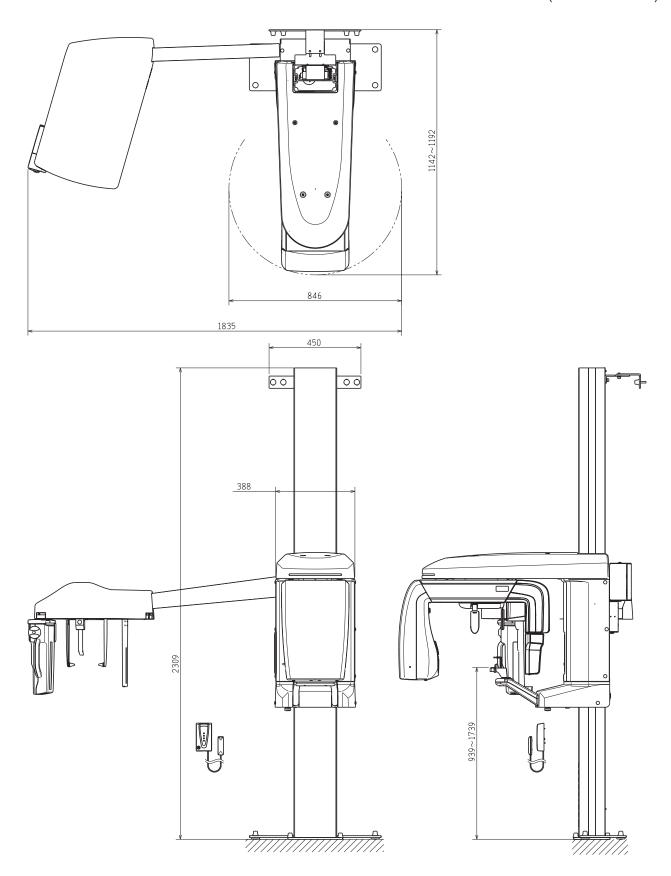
24: Standing position wall-mount long type: 3D Cephalometric type
